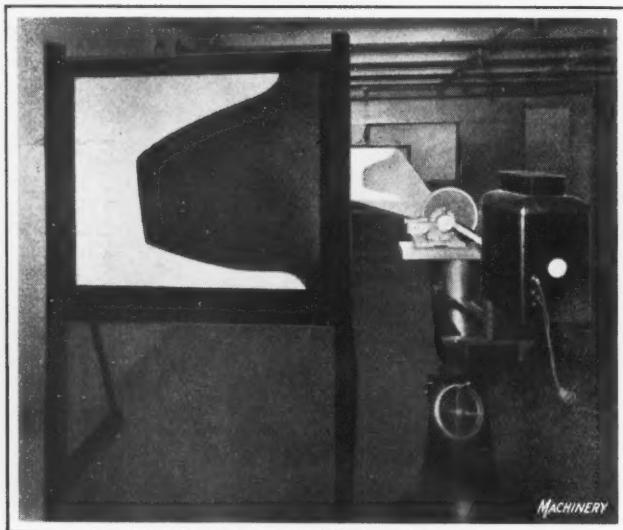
Using a Modified Hartness Screw Thread Comparator in studying a Tooth Profile
